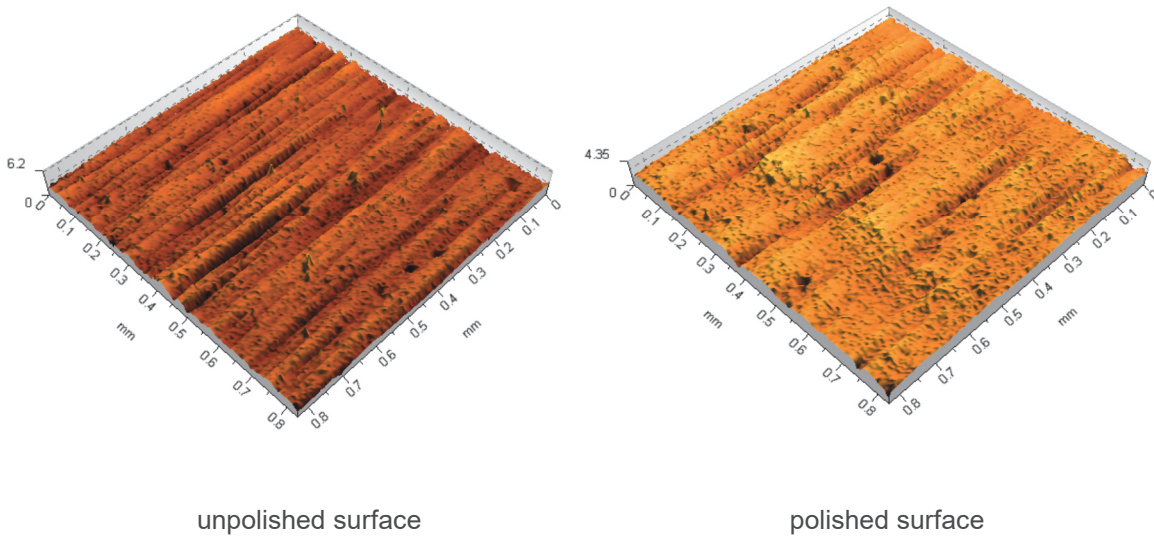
3D surface topography - forming tool with nACo® coating - circumference of the tool
